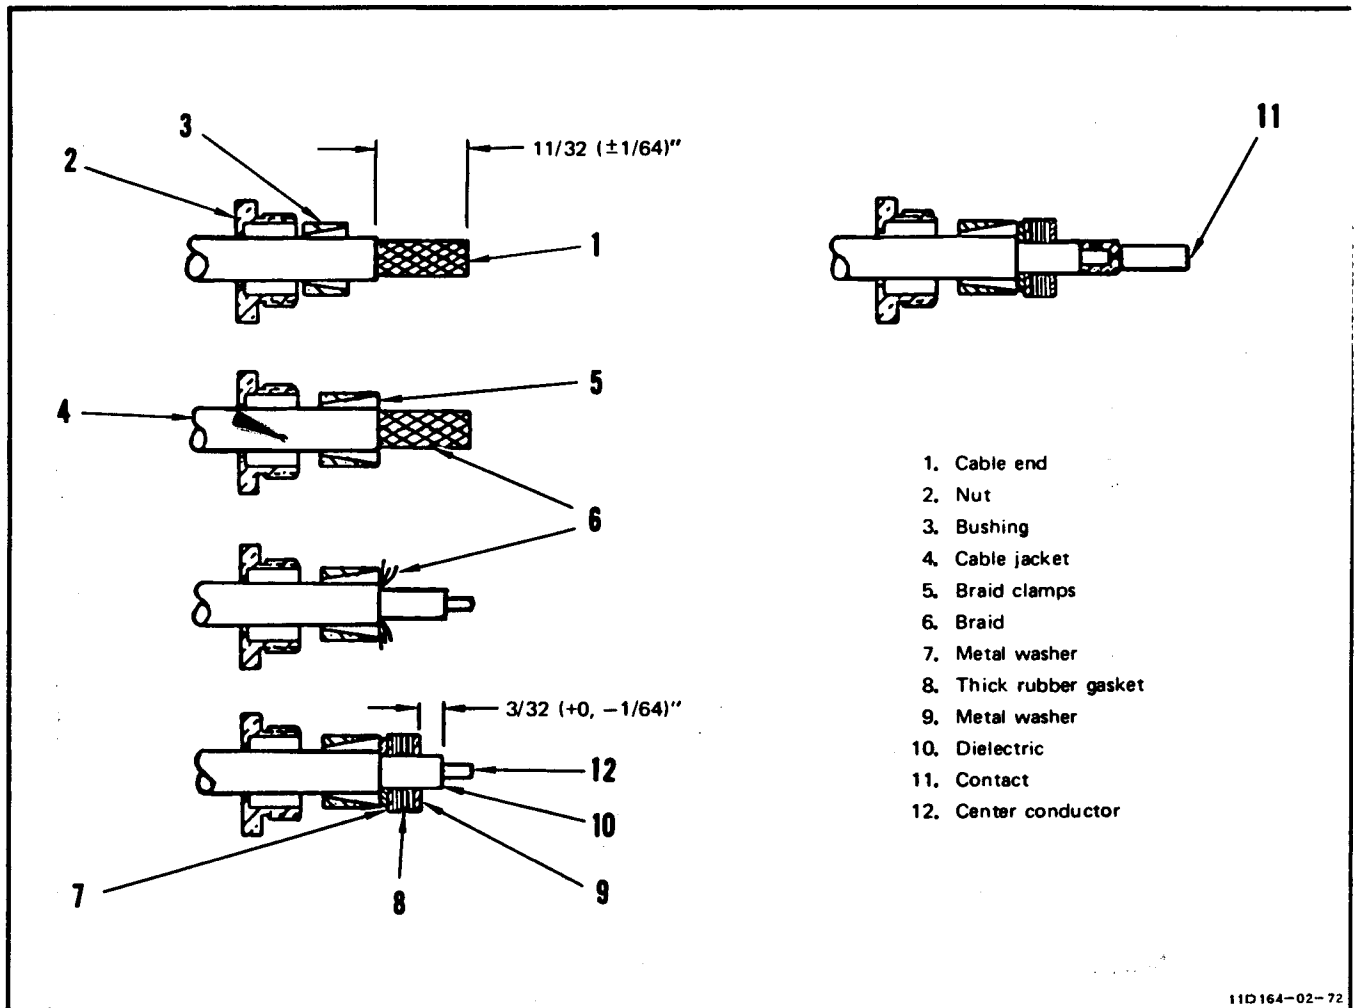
Miniature Coaxial Series Connectors - Contact Repair
